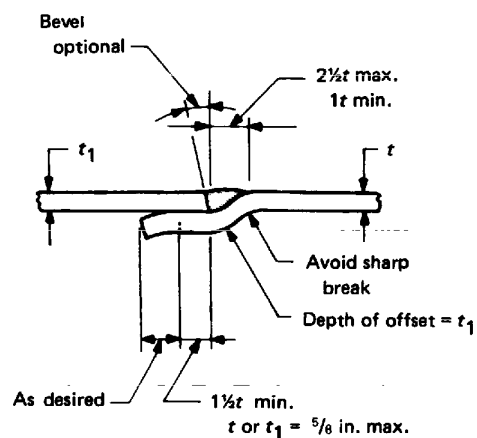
TUBES ATTACHED BY WELDING
